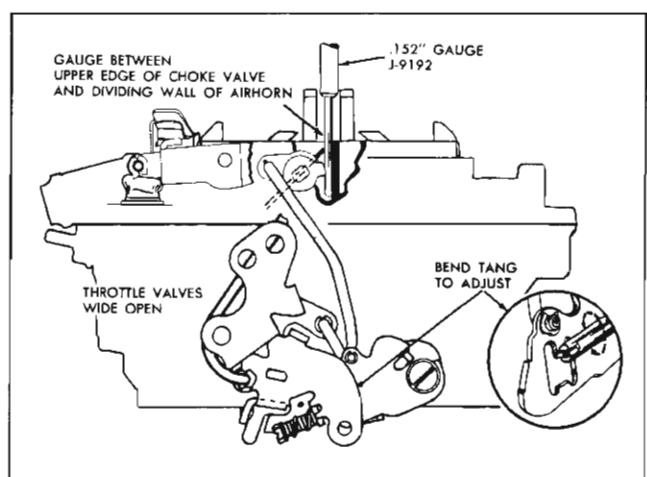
B-39 Unloader Adjustment (Shown off Car for Photographic Purposes)
